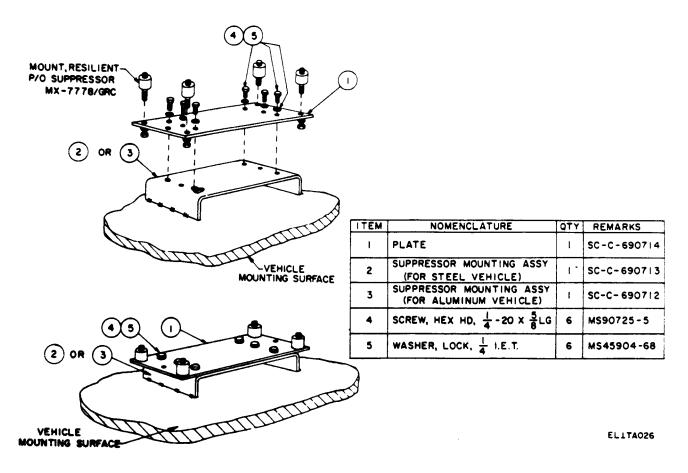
Exploded parts view of installation kit components for MX-7778/GRC.
